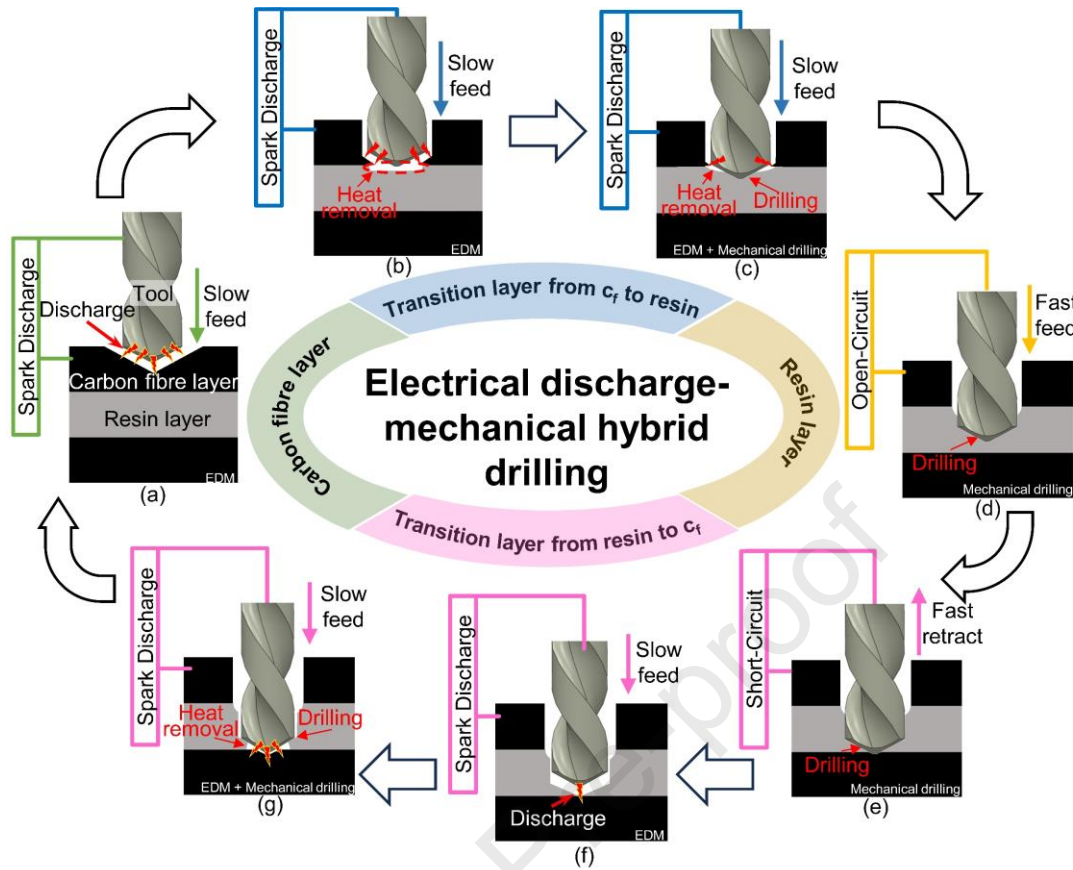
Principle of electrical discharge-mechanical hybrid drilling. (a) Machining of the carbon fibre layer. (b) The start of transition layer machining from carbon fibre layer to resin layer. (c) The end of transition layer machining from carbon fibre layer to resin layer. (d) Machining of the resin layer. (e) The moment when the tool electrode comes into contact with the carbon fibre and rapidly retract. (f) The start of transition layer machining from resin layer to carbon fibre layer. (g) The end of transition layer machining from resin layer to carbon fibre layer.
